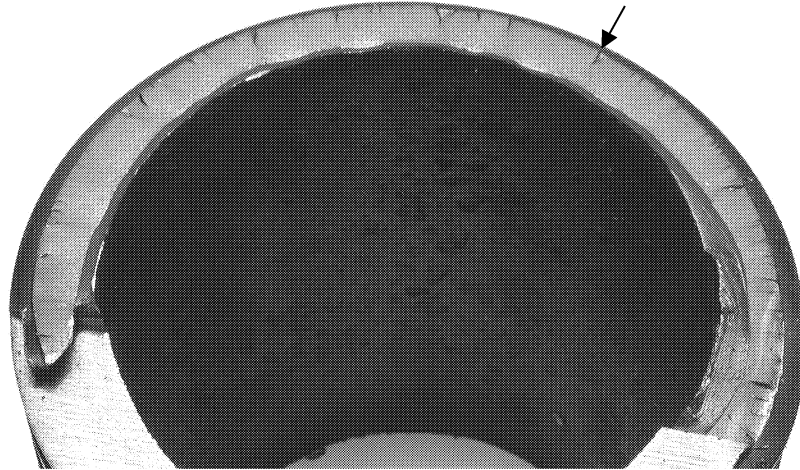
Fracture surface for an unrolled specimen. Failure after 100 850 cycles. Note the radial ductile fracture at the thread root connecting small cracks initiated at different planes (one is pointed out).
